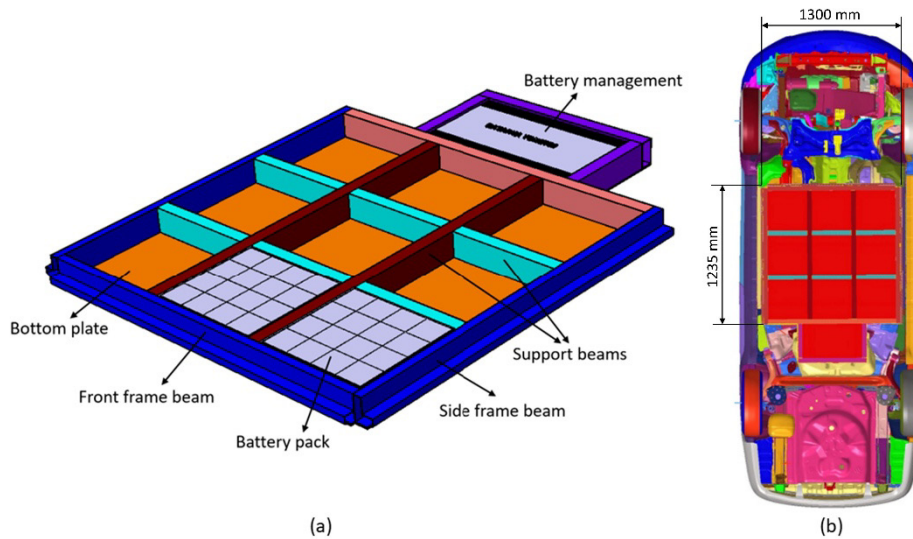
Battery box design (a) components (b) layout on the vehicle and outer dimensions.
